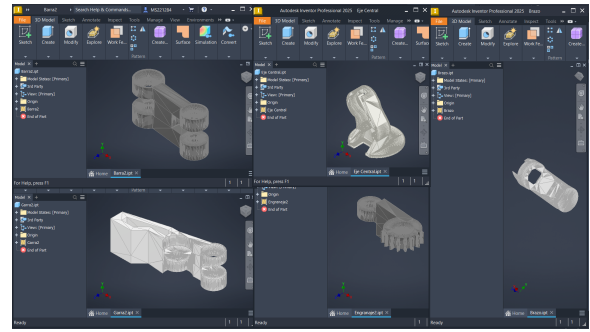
3D Parts of the Robotic Arm built on Autodesk Inventor 2025
